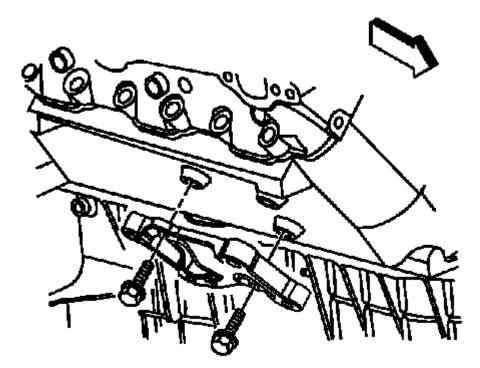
View Of Right Side (Left Side Similar) Engine Mount Side Bracket & Bolts Courtesy of GENERAL MOTORS CORP.
